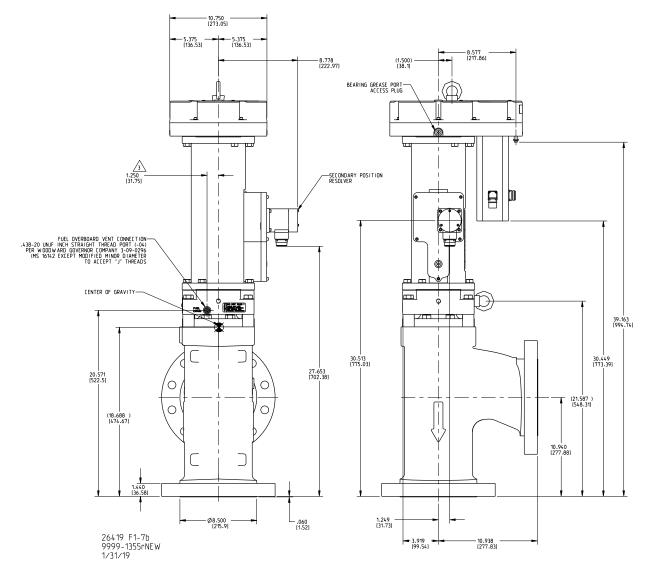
Outline Drawing (6-Inch LESV Class 300)
